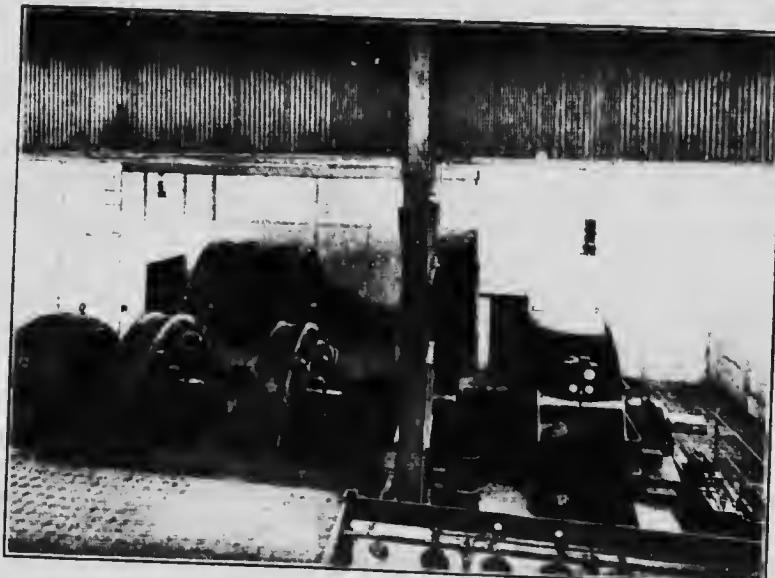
General view of the electrical plant for driving a 36-inch reversing blooming, roughing and finishing mill at the Skinningrove Iron Works. The 12,000 horse-power reversing motor will be seen in the background. The Ilgner motor generator set is in the foreground, consisting of a three-phase motor, two variable voltage dynamos and a 46-ton flywheel.
